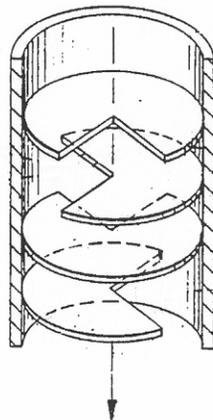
Partial cross sectional view of the barrier. (Taken from [8])
